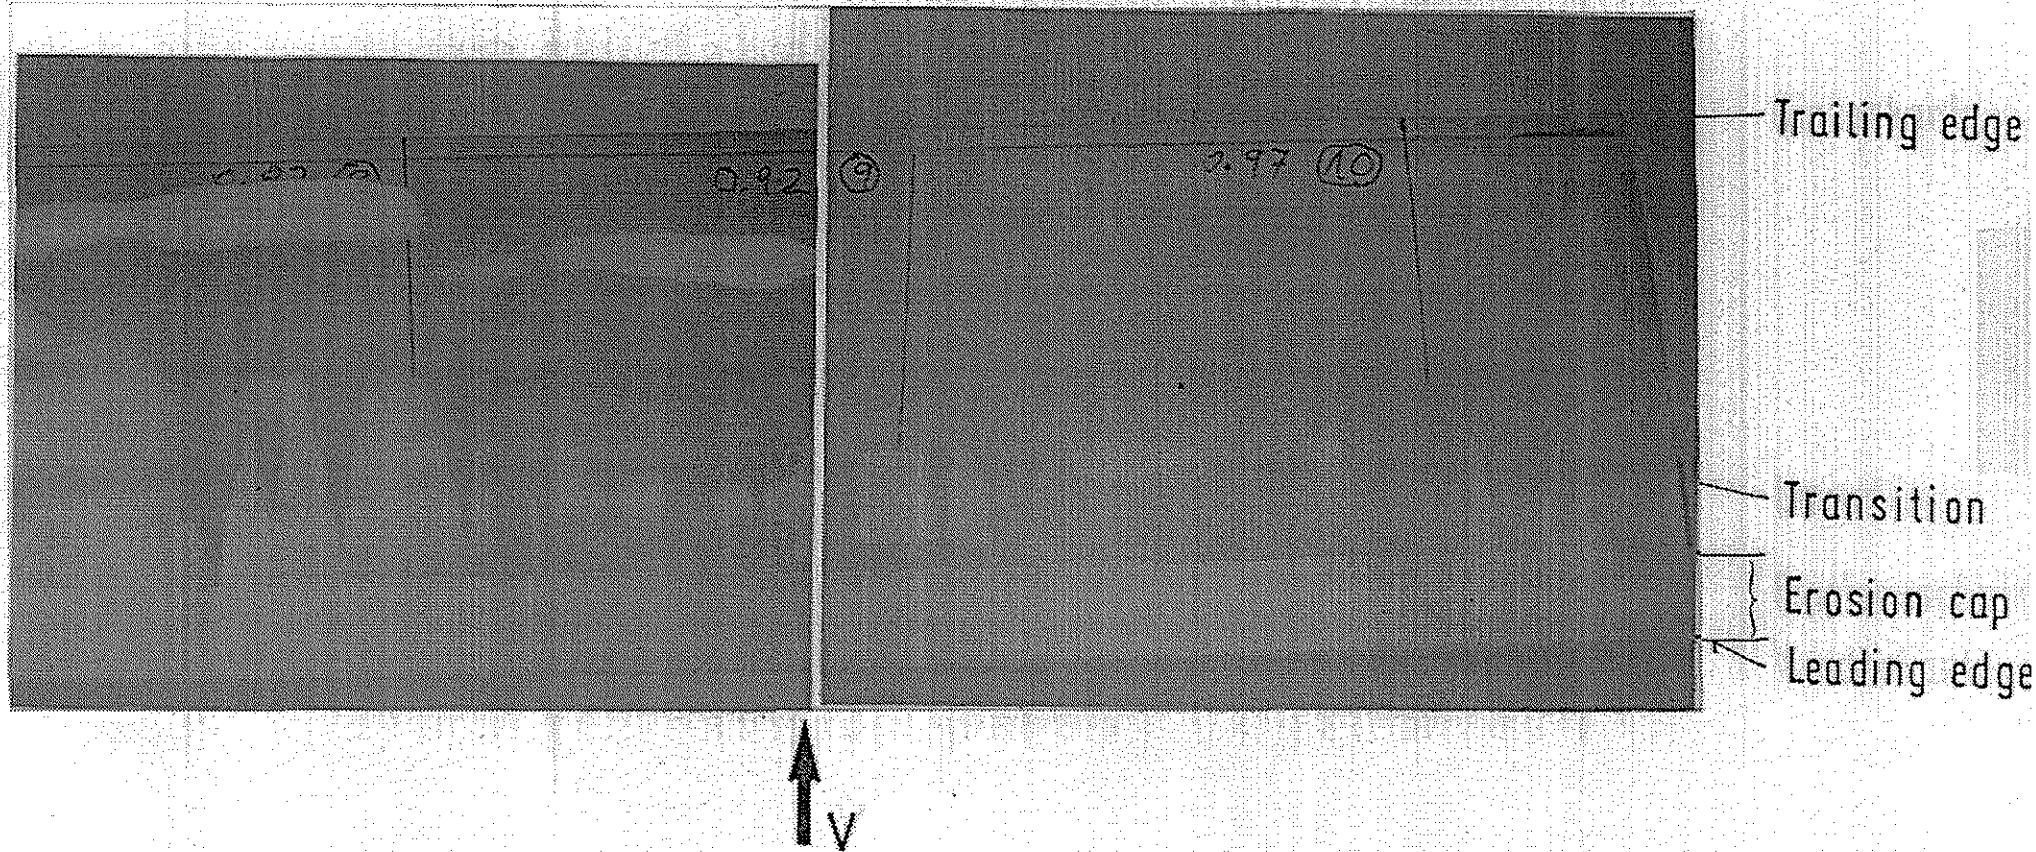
BO 105, Detail of Rotor Blade, Lower Surface $0.87 \leq r/R \leq 0.97$
